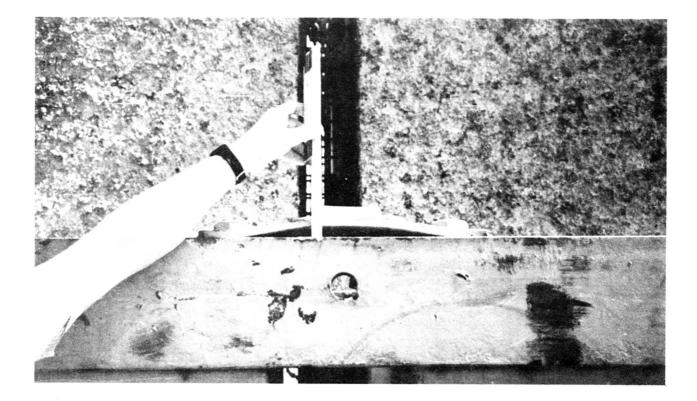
Port-Side Chain Plate Bent Along Outside Edge Where Not Welded to Assembly Angle
